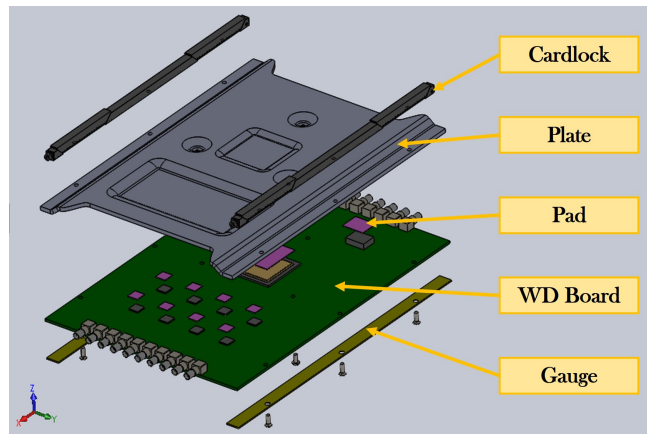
View of the waveform digitizer board. Heat is produced by electronic electronics and is dissipated through thermal path, composed of thermal pads, an aluminum plate, glue, cardlocks, the DAQ crate walls and the cooling pipe.
